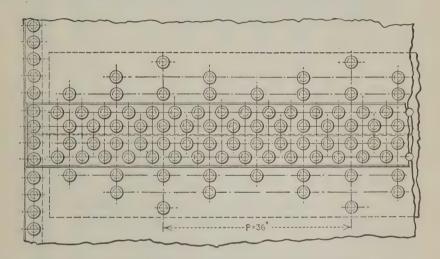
EXAMPLE OF BUTT AND DOUBLE STRAP JOINT, QUINTUPLE-RIVETED
